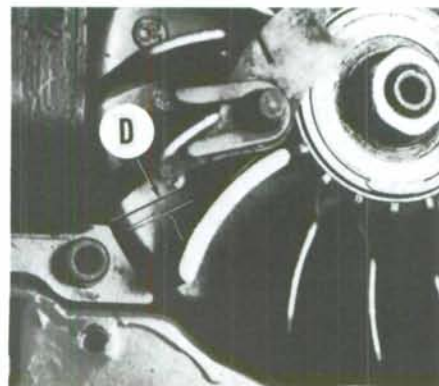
Distance (D) from flywheel mark to edge of coil leg should be 2.5 mm (0.1 in.) when breaker-points open.
